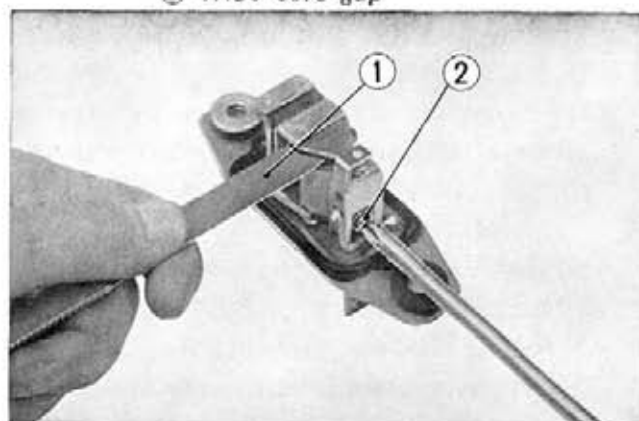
① Thickness gauge ② Core gap adjusting screw
